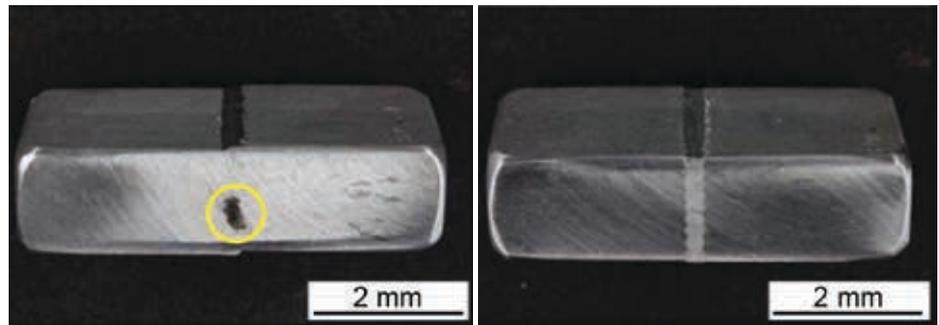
Corrosion specimens: uncoated edges (left side); coated specimen (right).
